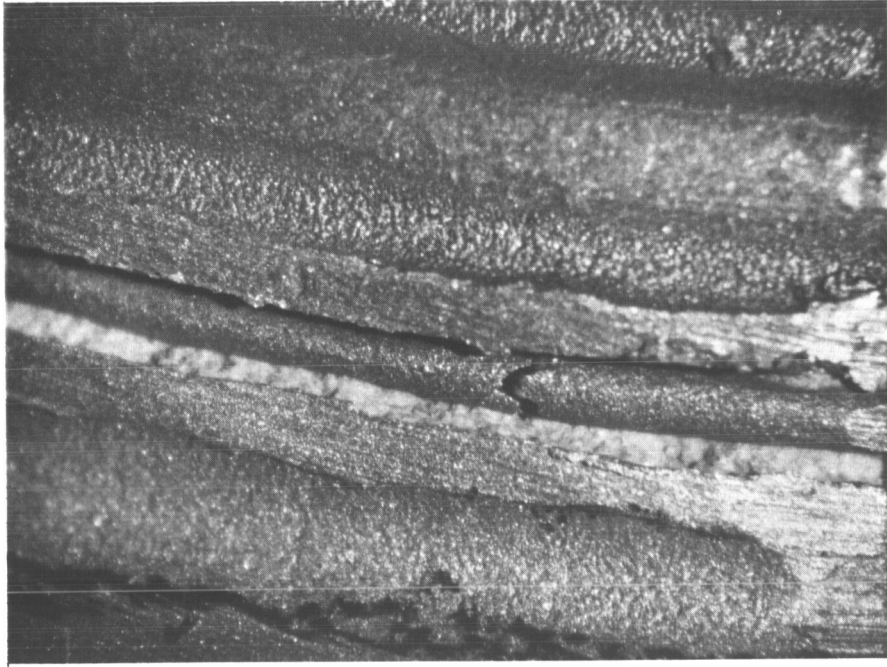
Twenty-Power Photograph of Heater Wire Crack
